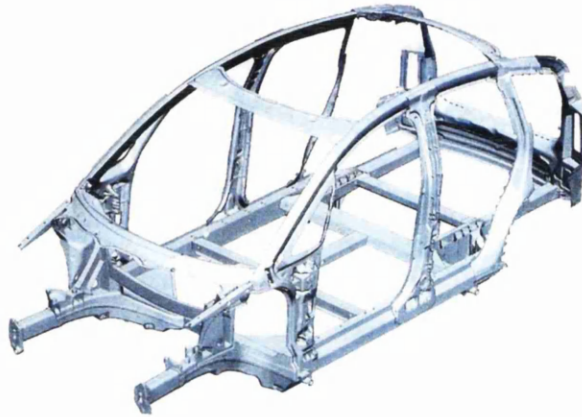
Audi A2 aluminium space frame (ASF®), comprising hydroformed aluminium extrusions, cast nodes and pressings.
